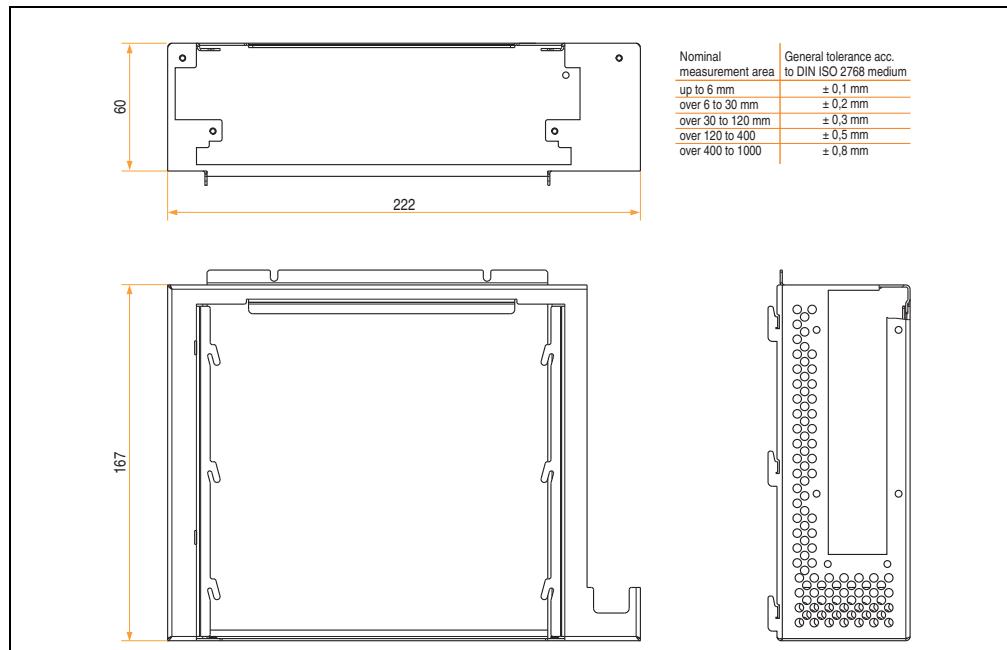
Dimensions - Expansion 5PC803.SX01-00
